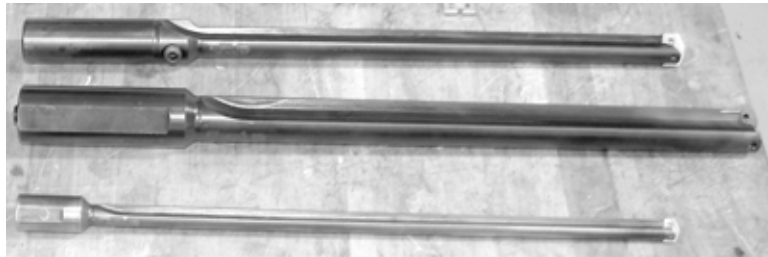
The photo shows (from top to bottom) the 3/4" insert holder, the 1" insert holder, and the 3/4" spotting drill.
